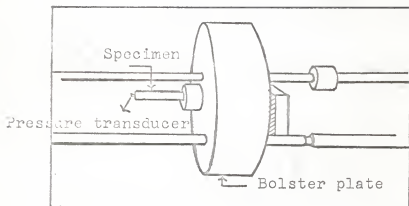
Dynapak machine setup for tubular specimen, Hoge.
